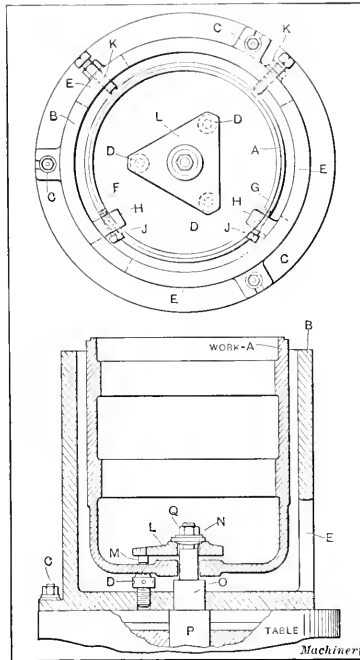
Pot Casting Fixture for holding Steel Castings on Vertical Turret Lathe
